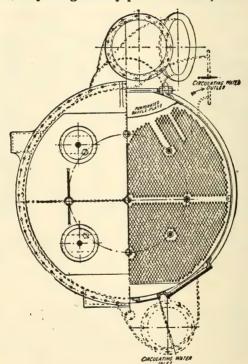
End Sectional View of Cylindrical Horizontal Surface Condenser, Showing a Portion of the Tubes.
